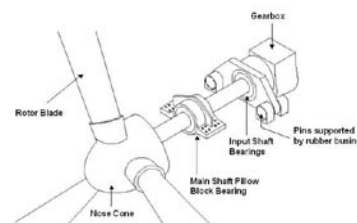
MAIN SHAFT GENERAL ARRANGEMENT
